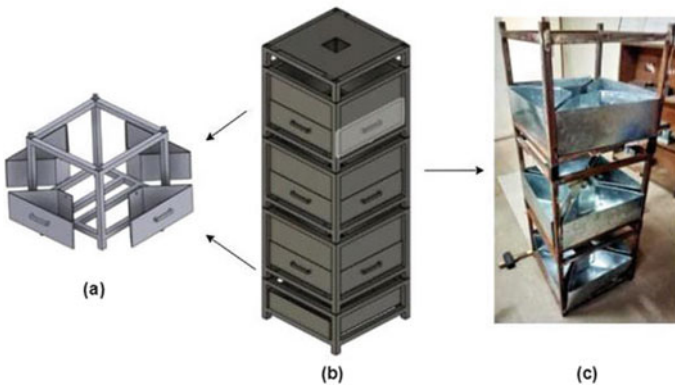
a Single unit of stack, b CAD representation of final model and c final assembly of fabricated model
